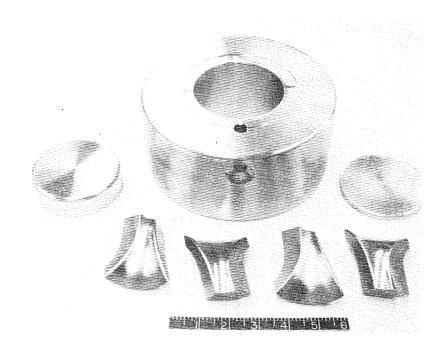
Cores, Pressure, Plates, and Outer Containment Tooling
